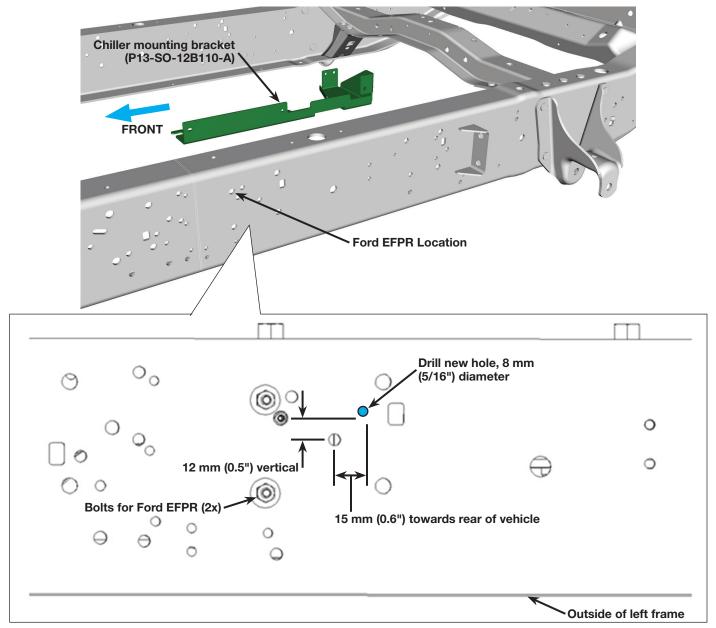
Marking Chiller Mounting Bracket Front Hole
